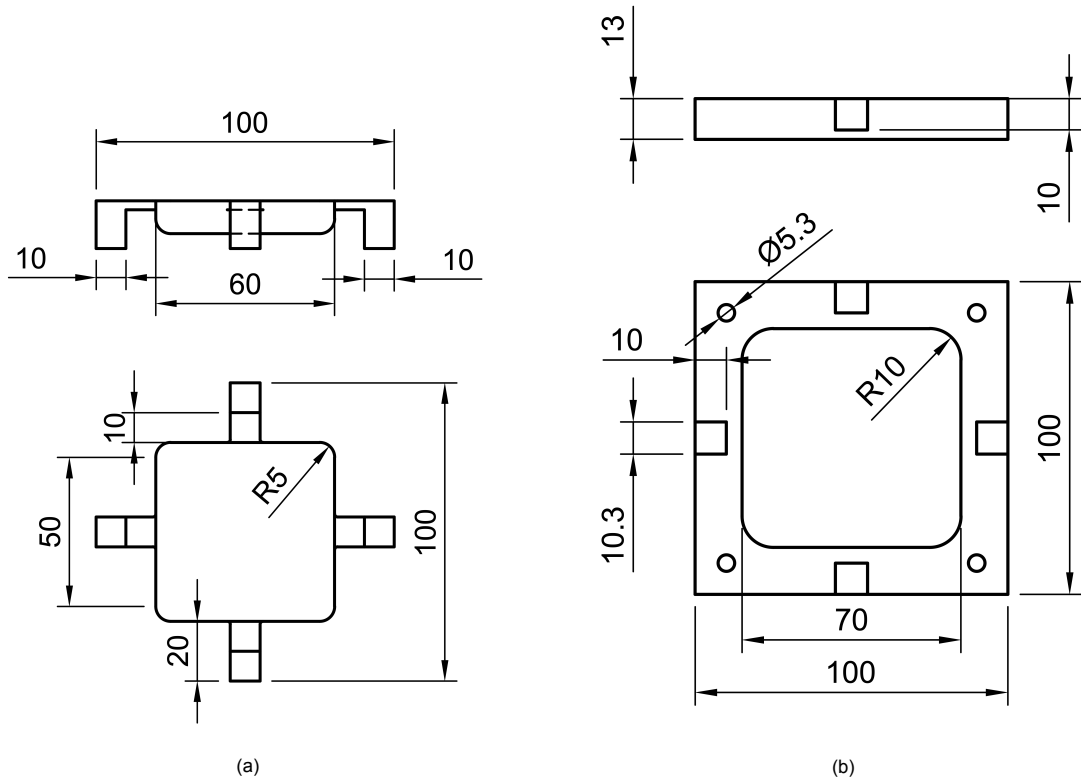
Drawing of side- and top-view of top and bottom part of the hinge mold. (a) The dimensions of the top part of the hinge mold. (b) The dimensions of the bottom part of the hinge mold. Together these parts could be used to form half of the compliant hinge shape.
